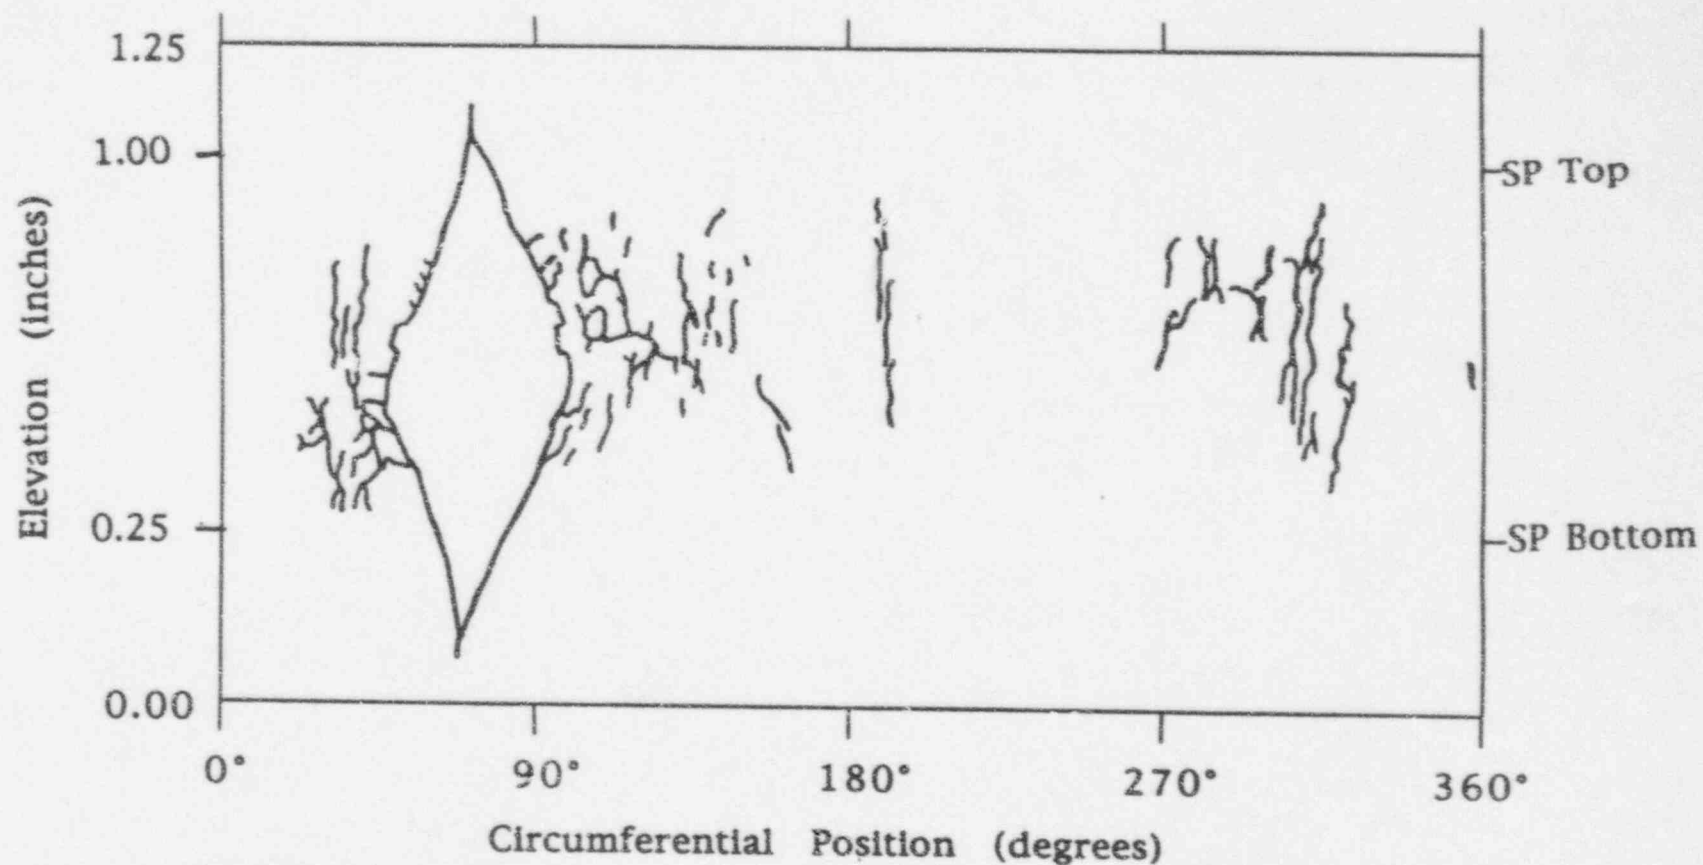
Sketch of the OD surface crack distribution found at the fifth tube support plate (TSP5) region of Tube R20-C102. Also shown is the location of the burst fracture opening. The burst opening extended beyond the TSP crevice region, but the corrosion cracking on the burst fracture was confined to the crevice region.
